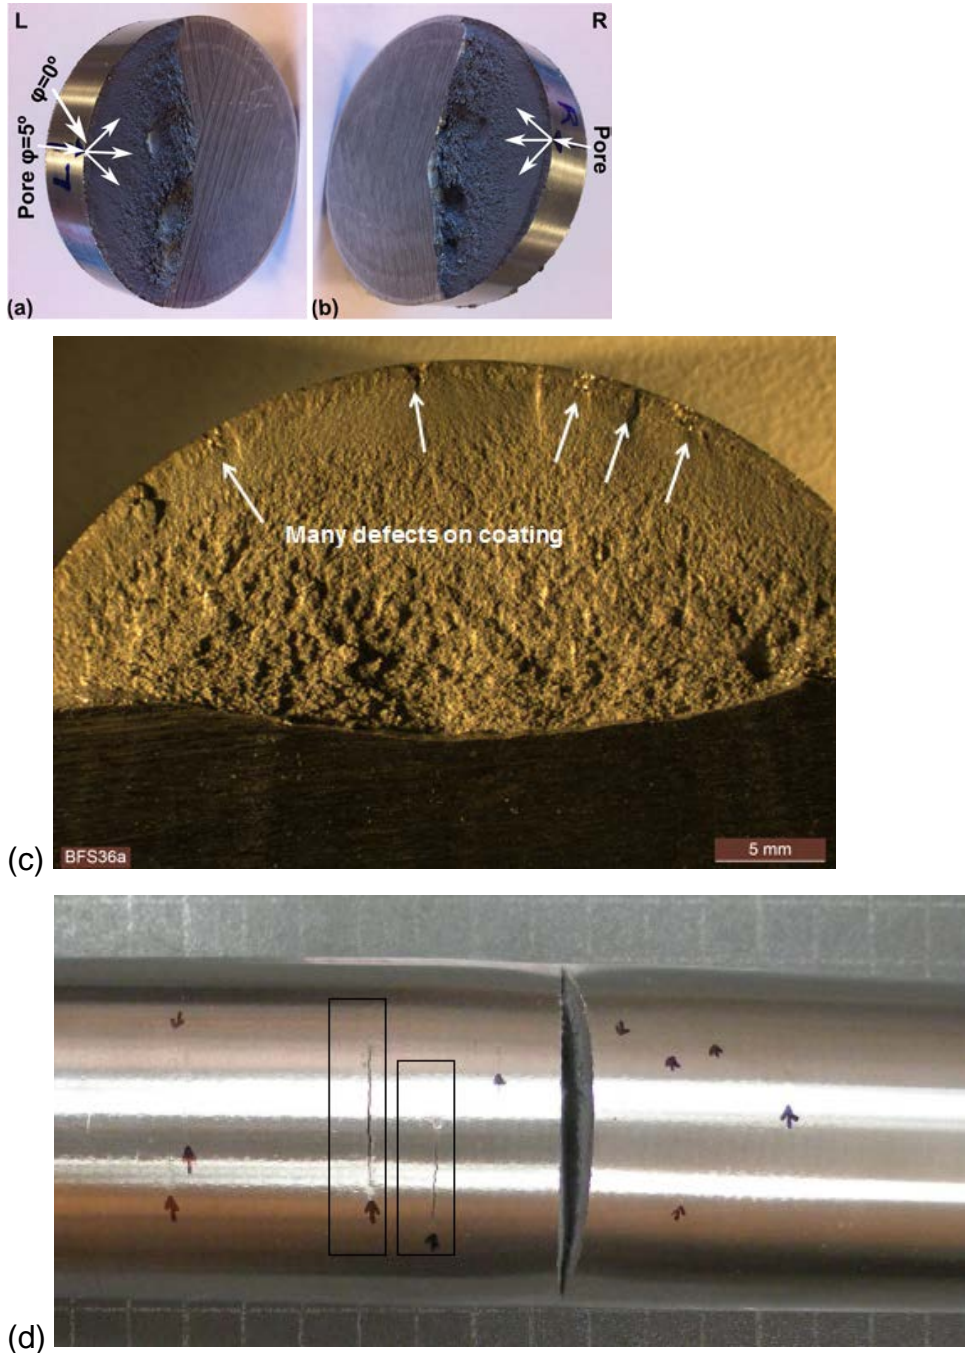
Locations of defects at a cylindrical rod: (a),(b) pore almost at azimuthal position $\varphi=0$ of maximum stress, initiating primary cracking; (c) numerous defects (arrows) at different azimuthal positions of the fracture surface border; (d) defects marked at the rod surface, including two defects initiating secondary and tertiary cracking (rectangles)
